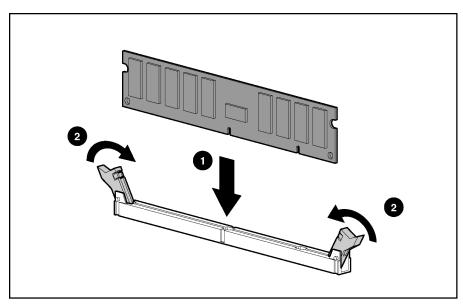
Installing a DDR SDRAM DIMM into the expansion socket
